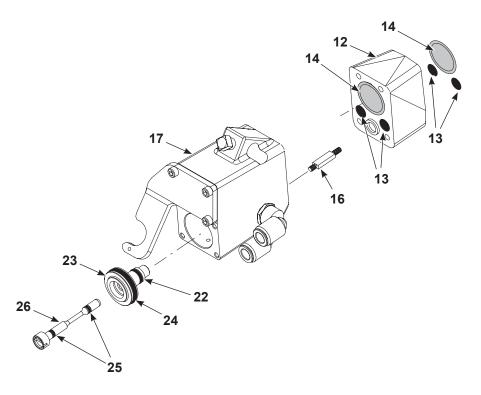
Removing the Spacer and Piston from the Gun Body
